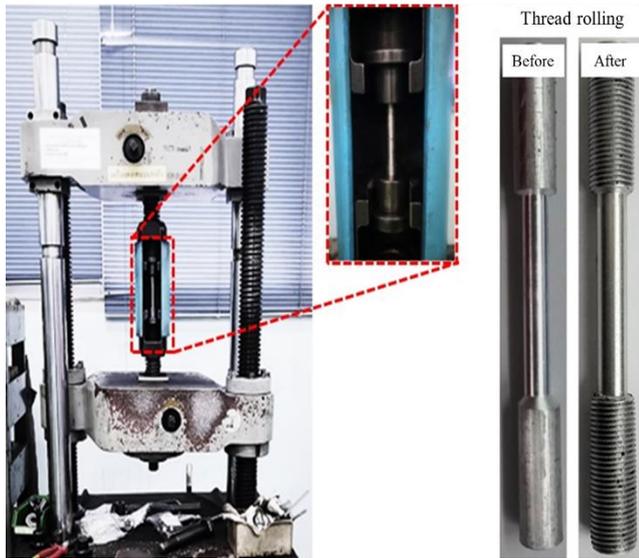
Universal testing machines and rotary friction welding specimen before thread rolling and after thread rolling.
